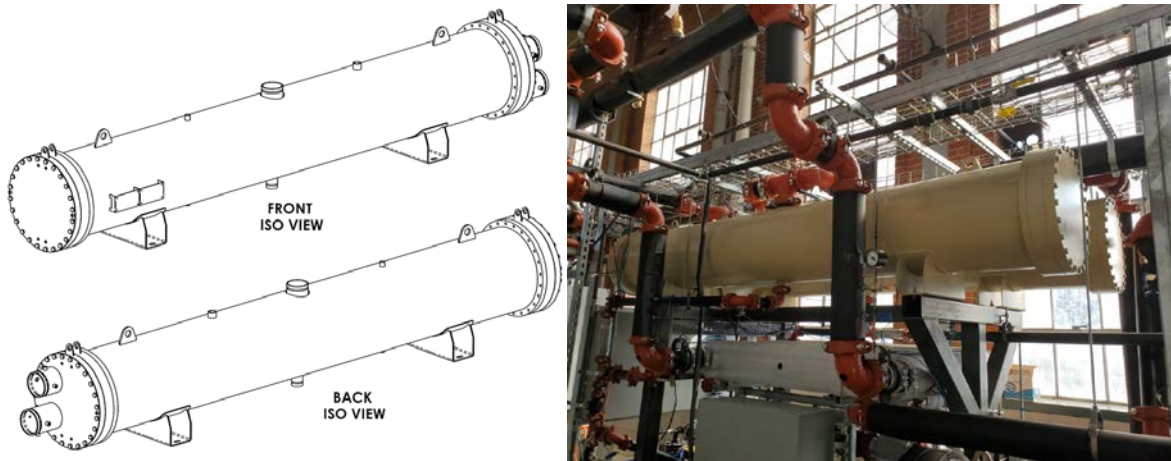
Condenser engineering drawings (Left) and installed units (Right)
